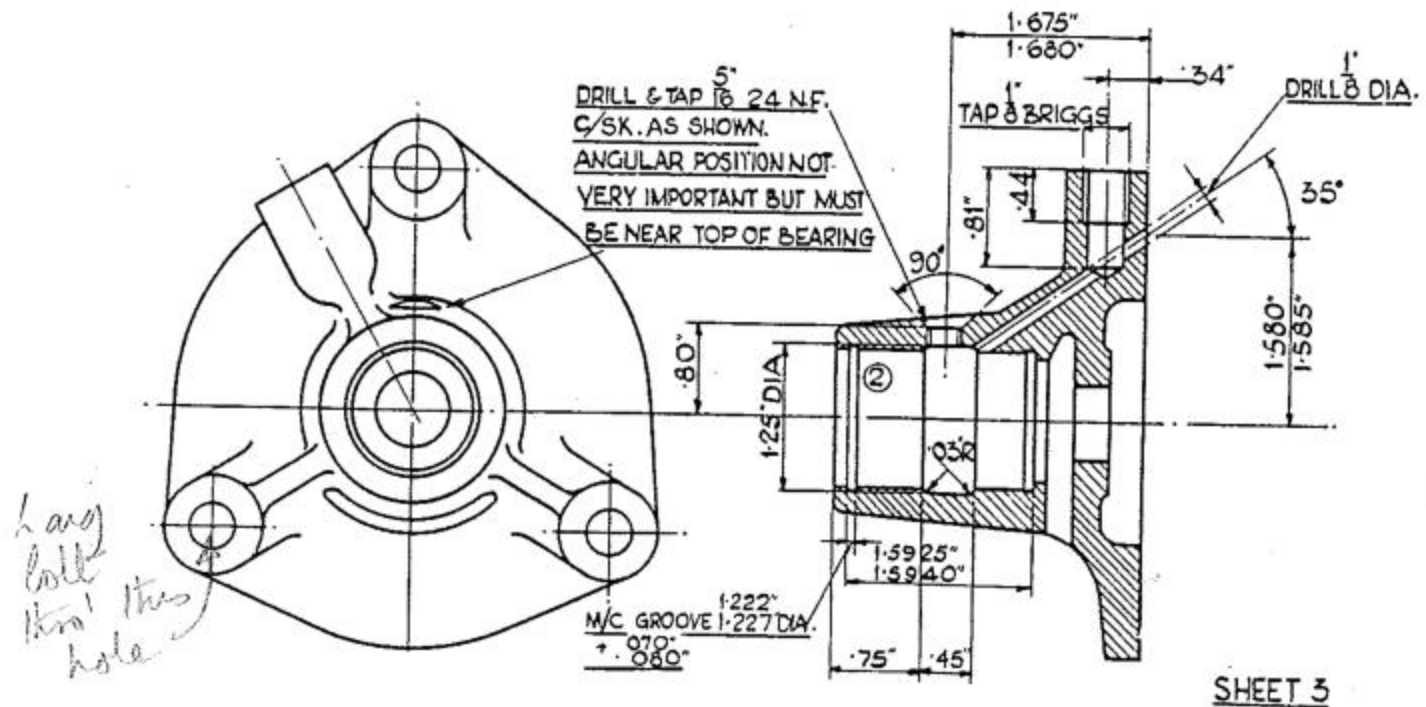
Service mod. to water pump bearing housing Standard and Triumph 2-litre model
